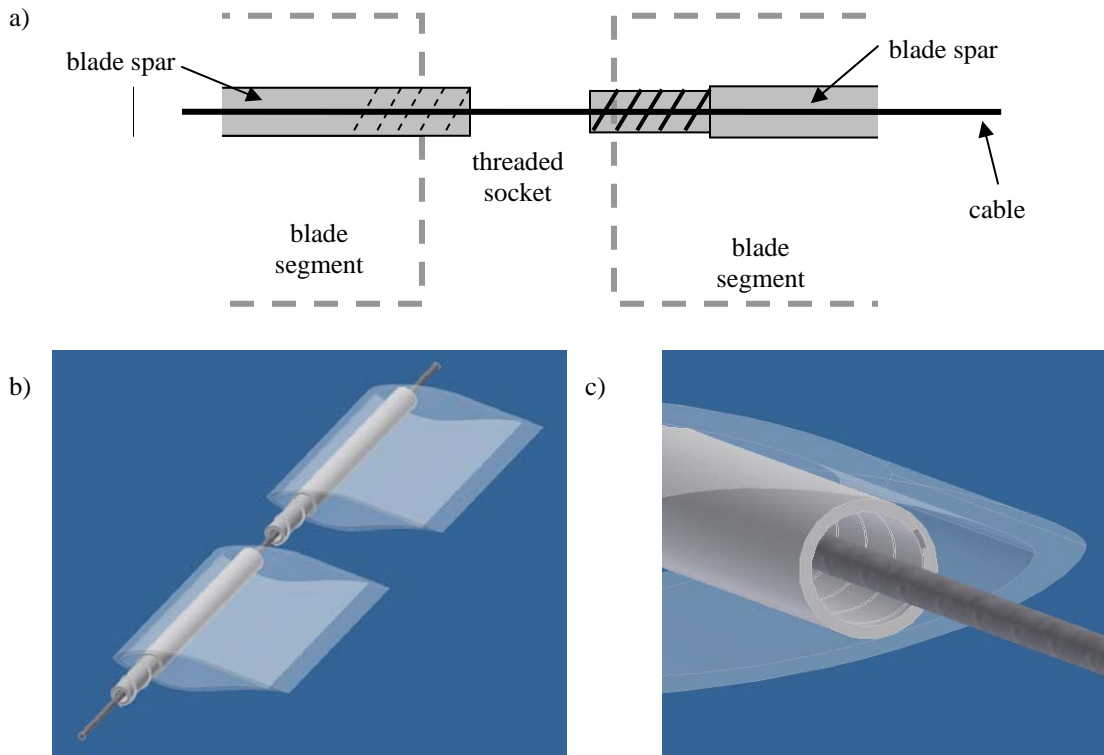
Concept of threaded socket between two blade segments showing exploded view (before joining): a) diagram view from above, b) illustrated perspective view, c) illustrated close-up of internally-threaded portion.
